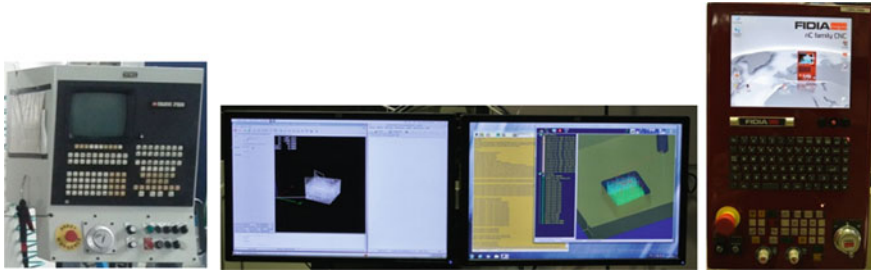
IRCCyN’s Sabre machine-tool equipped with the Open-NC controller
